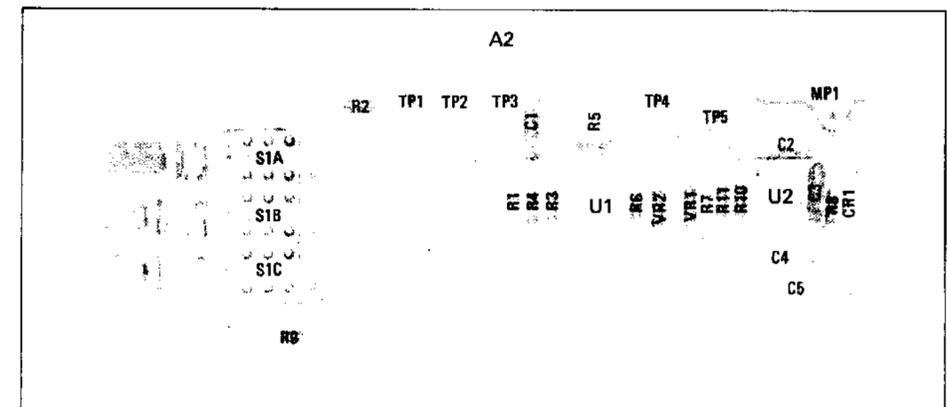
A2 Meter Switch/Detector Assembly Component Locations
